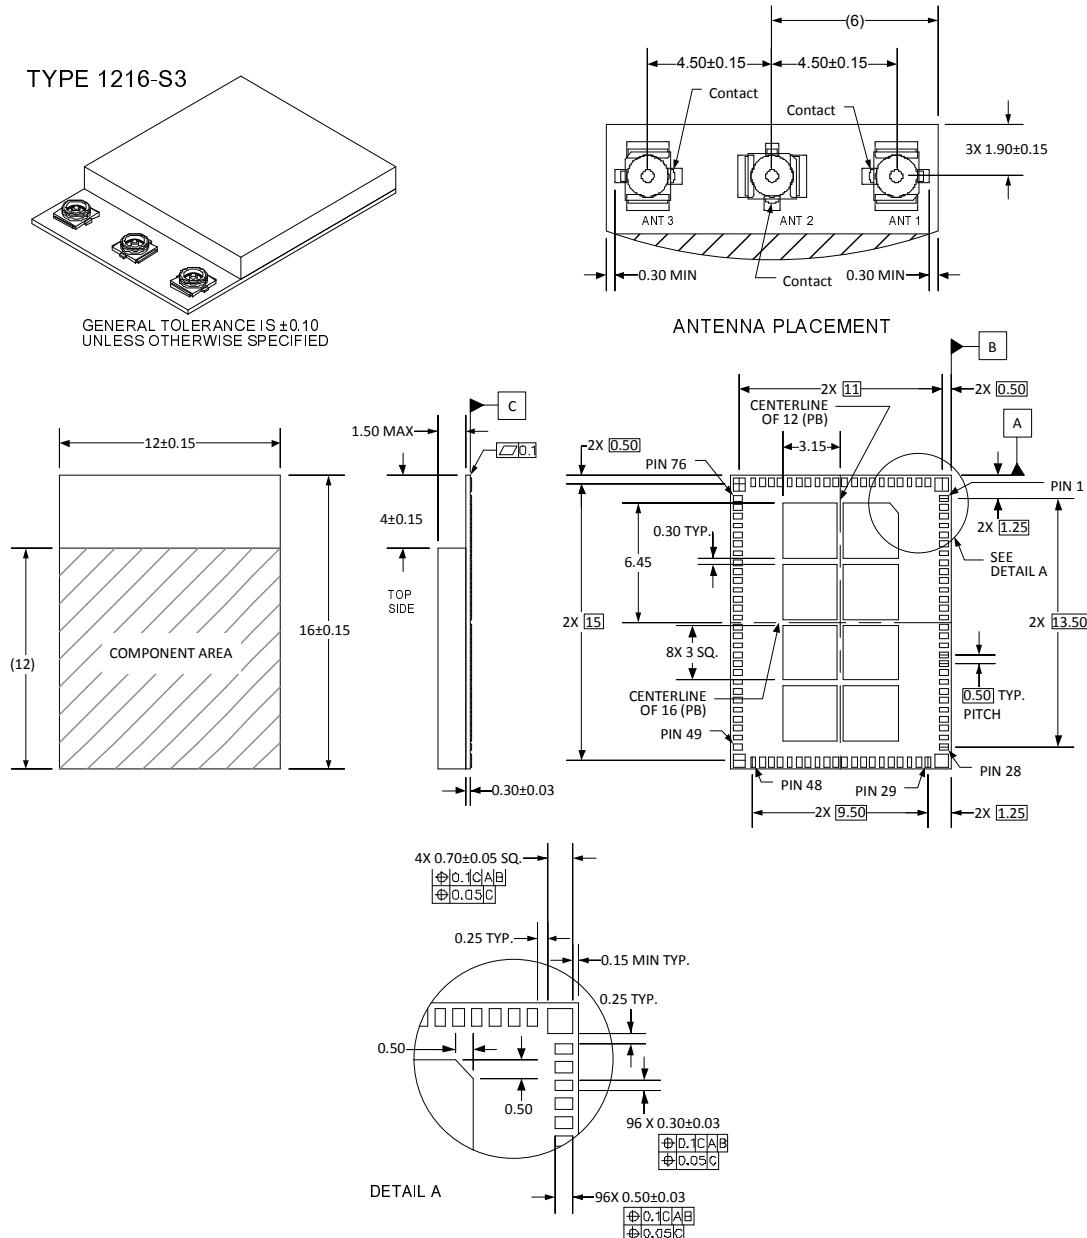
Type 1216 Soldered Down Solution Module Diagram
